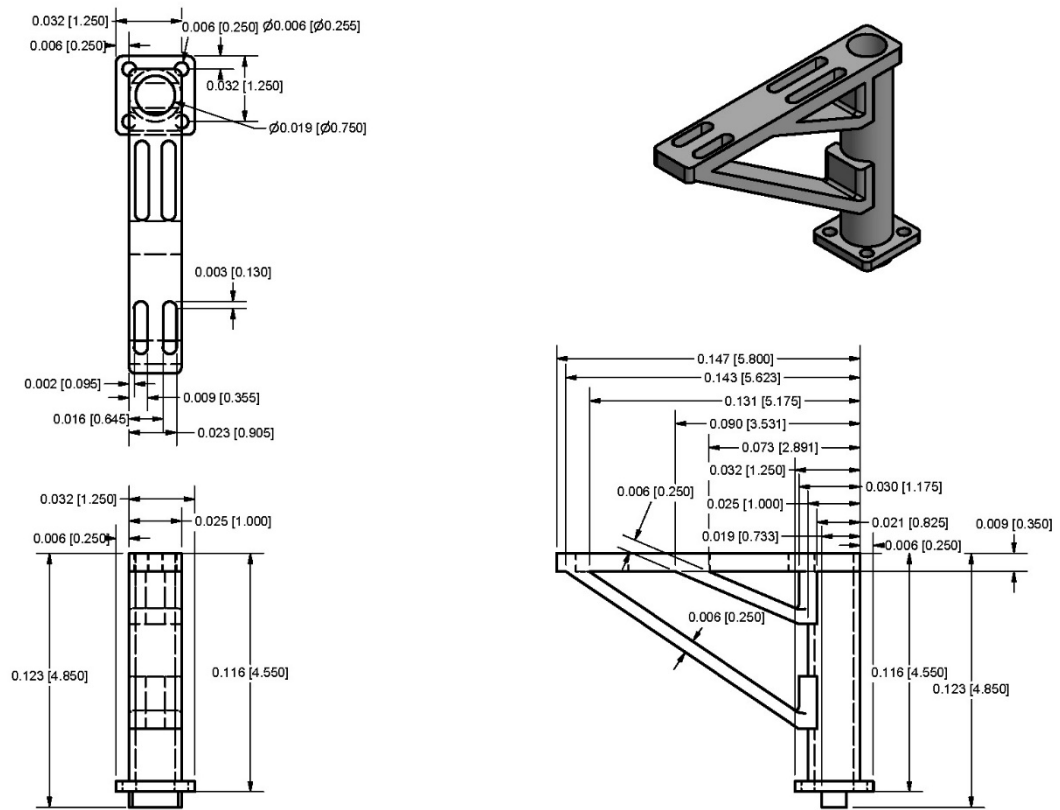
Cable carrier mount to secure the flexible carrier to it to translate along with the carriage assembly.
